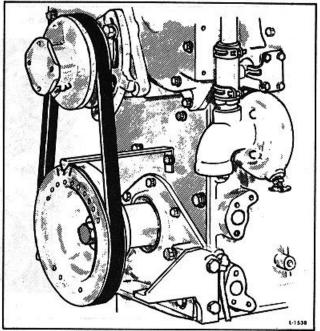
Pointer Installation for Marking Top-Dead-Center
